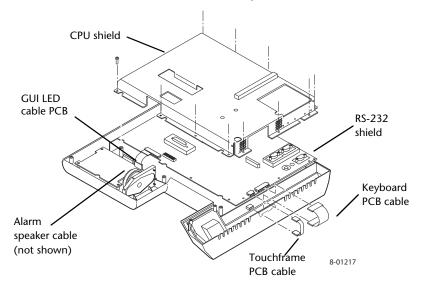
Removing the 10.4-inch CPU shield and GUI PCB
